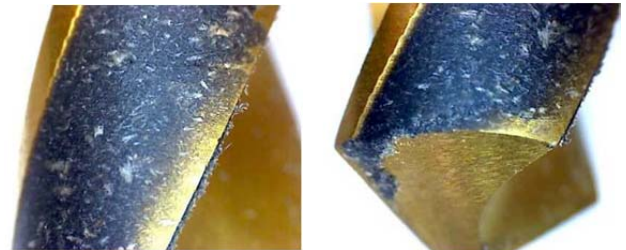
Detail of a TiN-coated high-speed steel drill after drilling (HDPE matrix adhered in the drill groove, drilled material: WPC) [23]
